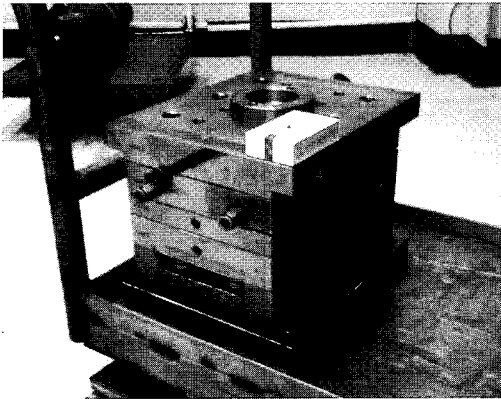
Manufactured mold and molded part for thin-walled outsert moldframe
